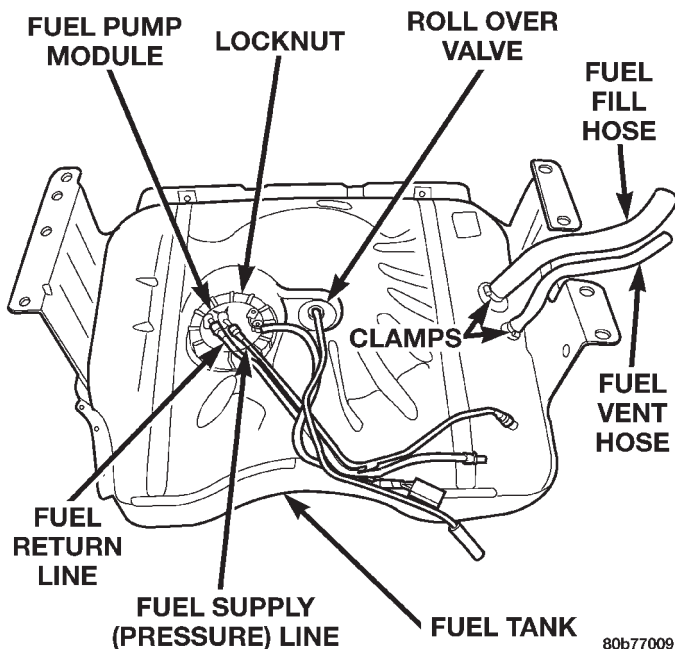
Top View of Fuel Tank and Fuel Pump Module
